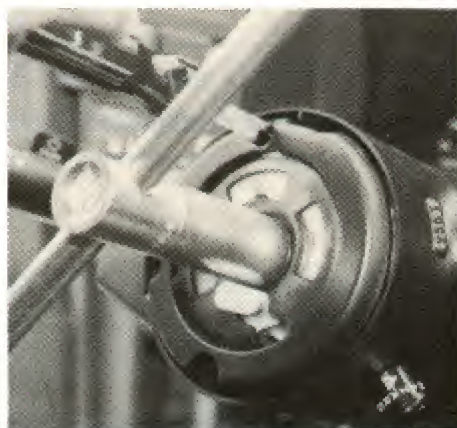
The mounting feet and screws of the armor plate are hid behind the steering wheel lock plate. In order to remove the armor plate it is necessary to align enlarged slots in the steering wheel lock plate with the mounting feet and screws of the armor plate.
